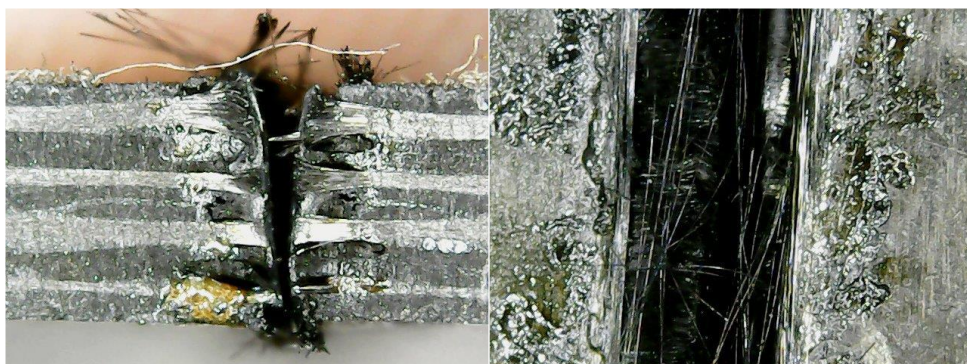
Microscope images of edge side (left) and top side (right) of laser cutting test 48.
